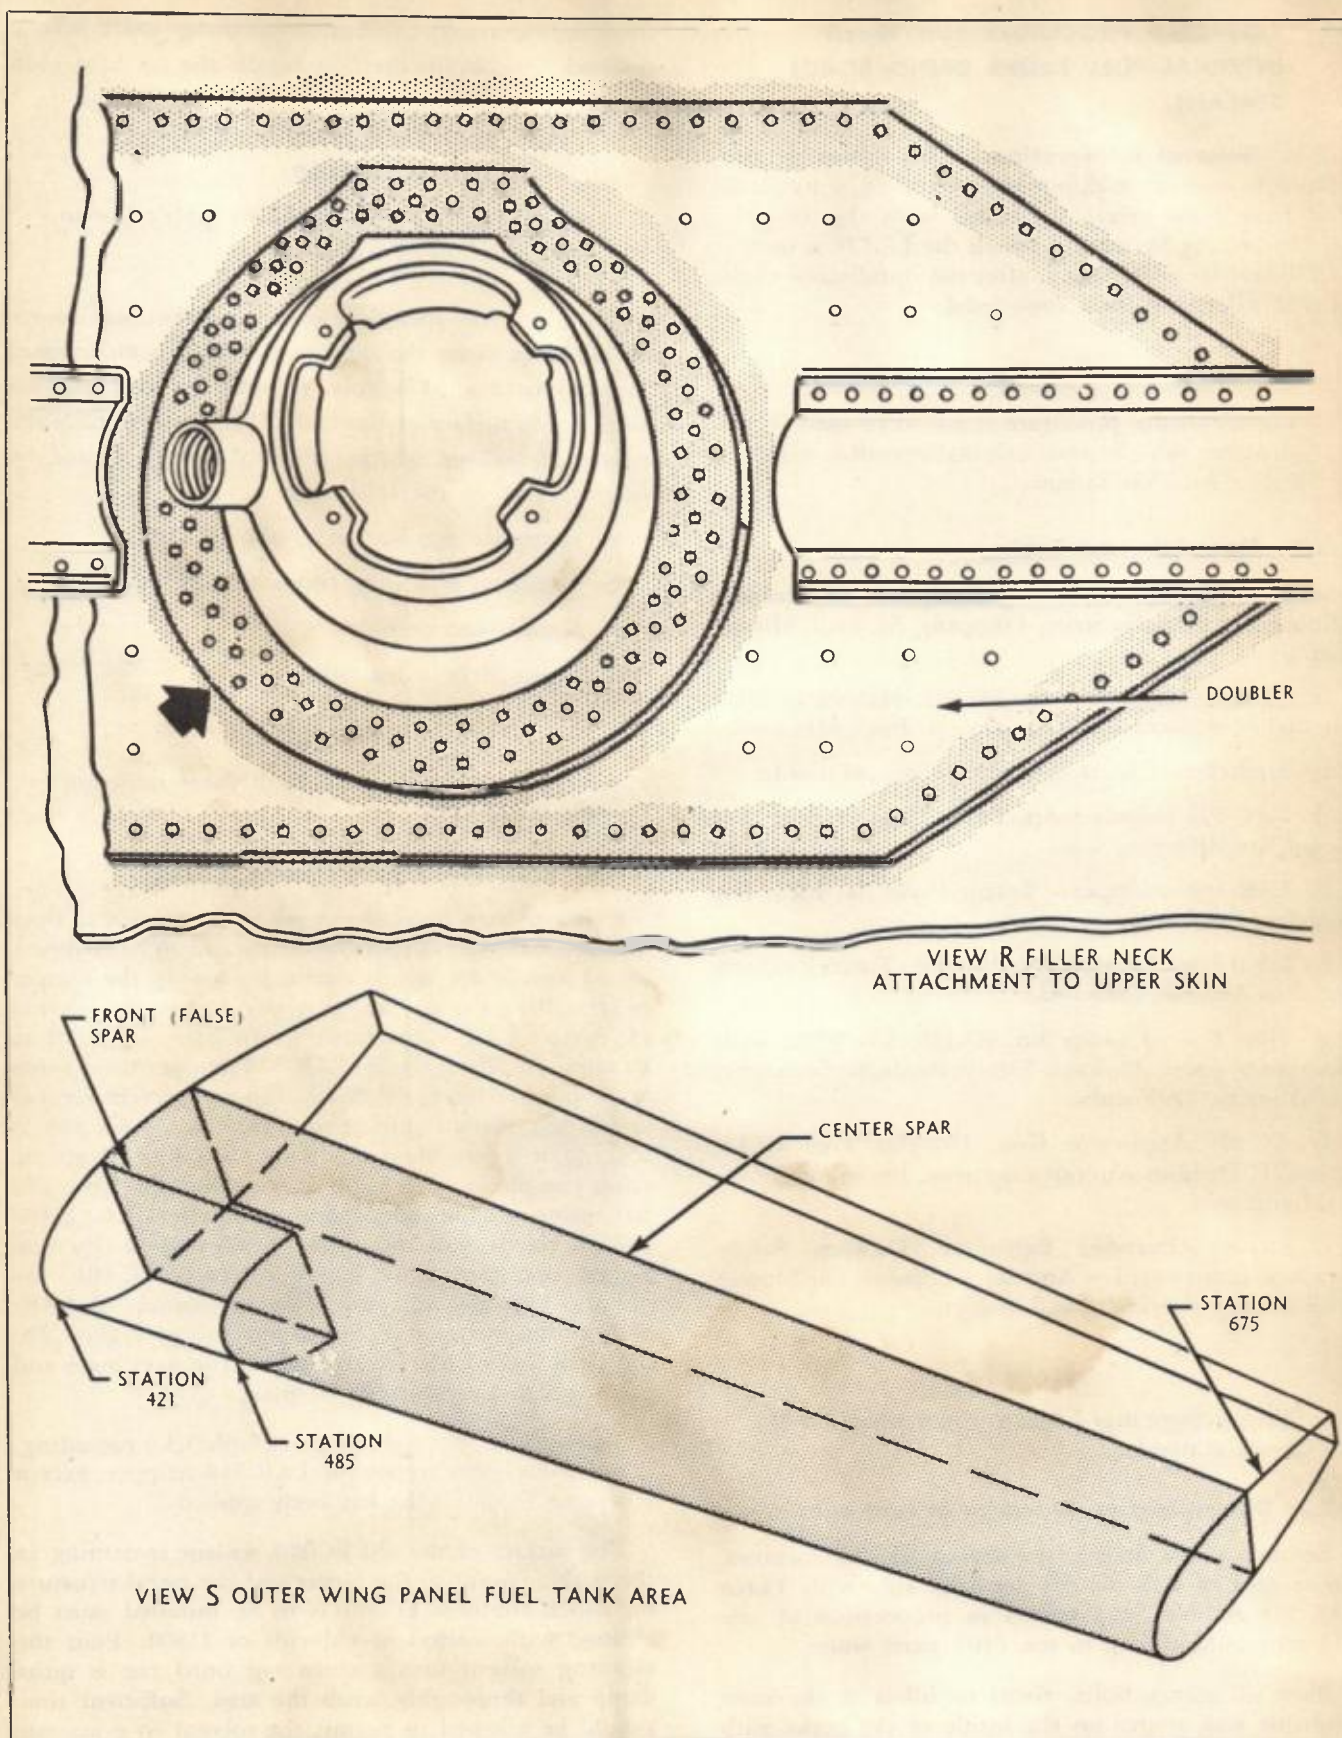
(Sheet 6 of 6 Sheets) — Fuel Tanks — Possible Leakage Areas
